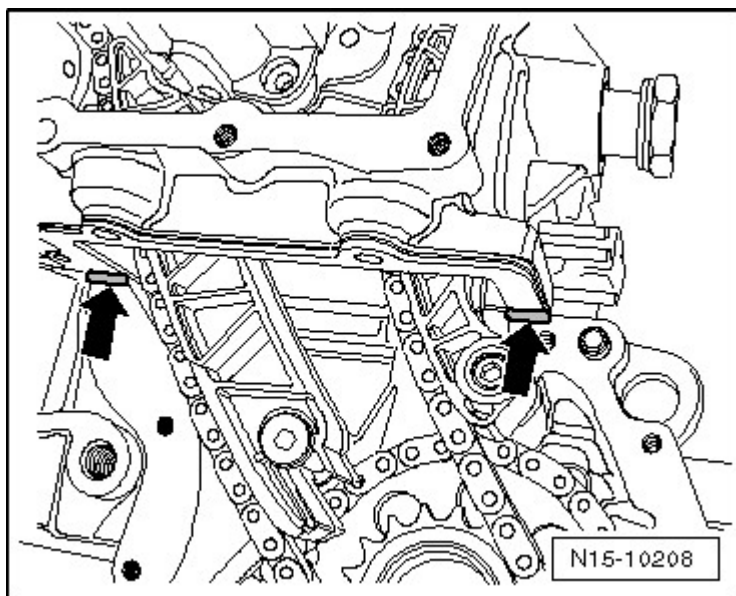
Identifying Sealant Locations For Corners Of Cylinder Block/Cylinder Head
